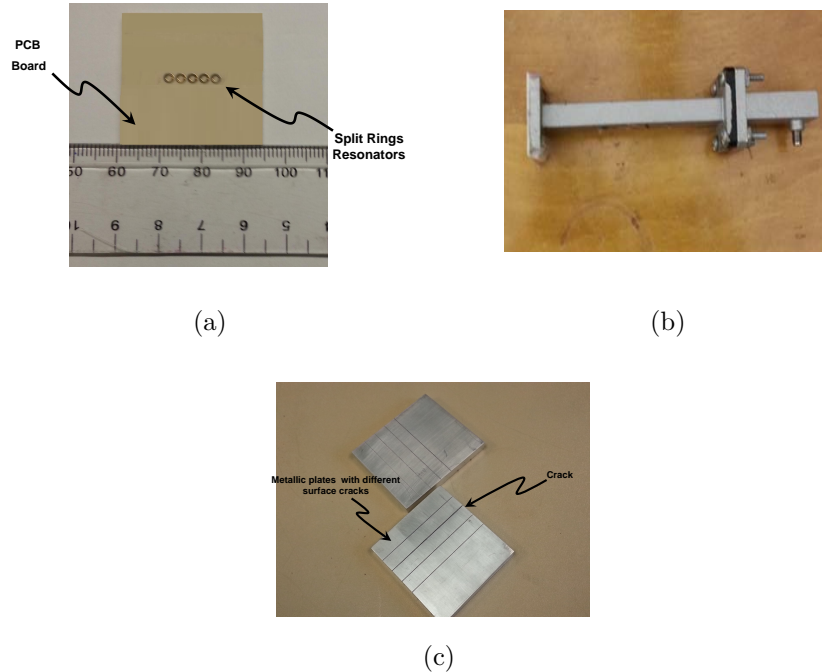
Photographs of the sensor. (a) Used waveguide sensor side view. (b) PCB board with split ring resonators. (c) A photograph of metallic plates with different cracks.
